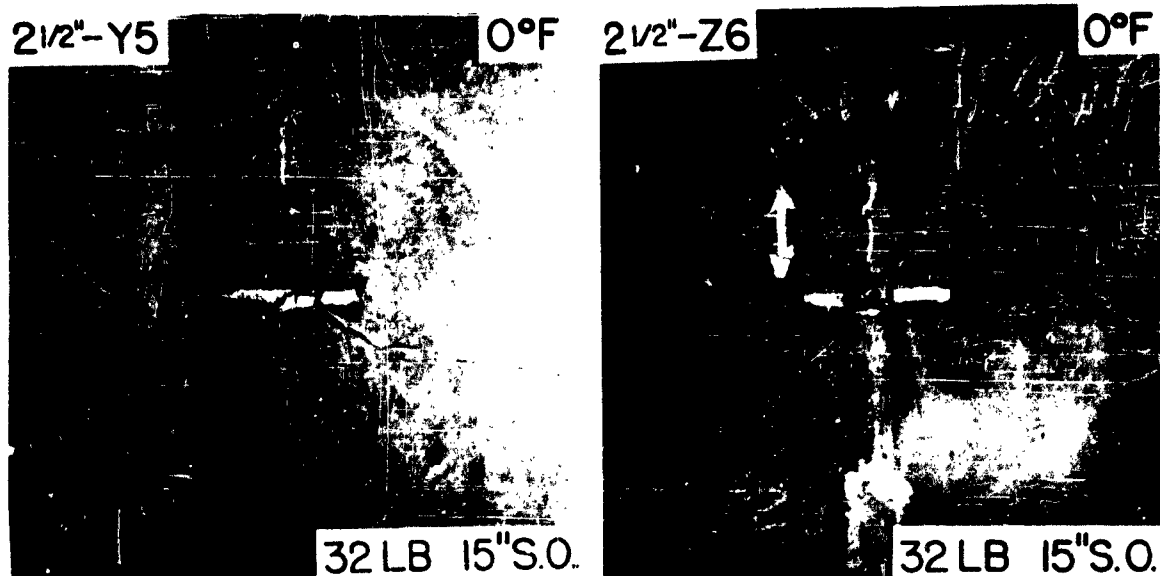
Duplicate 2-1/2-in. thick crack-starter explosion-bulge test plates exhibiting brittle fracture at 0°F.
